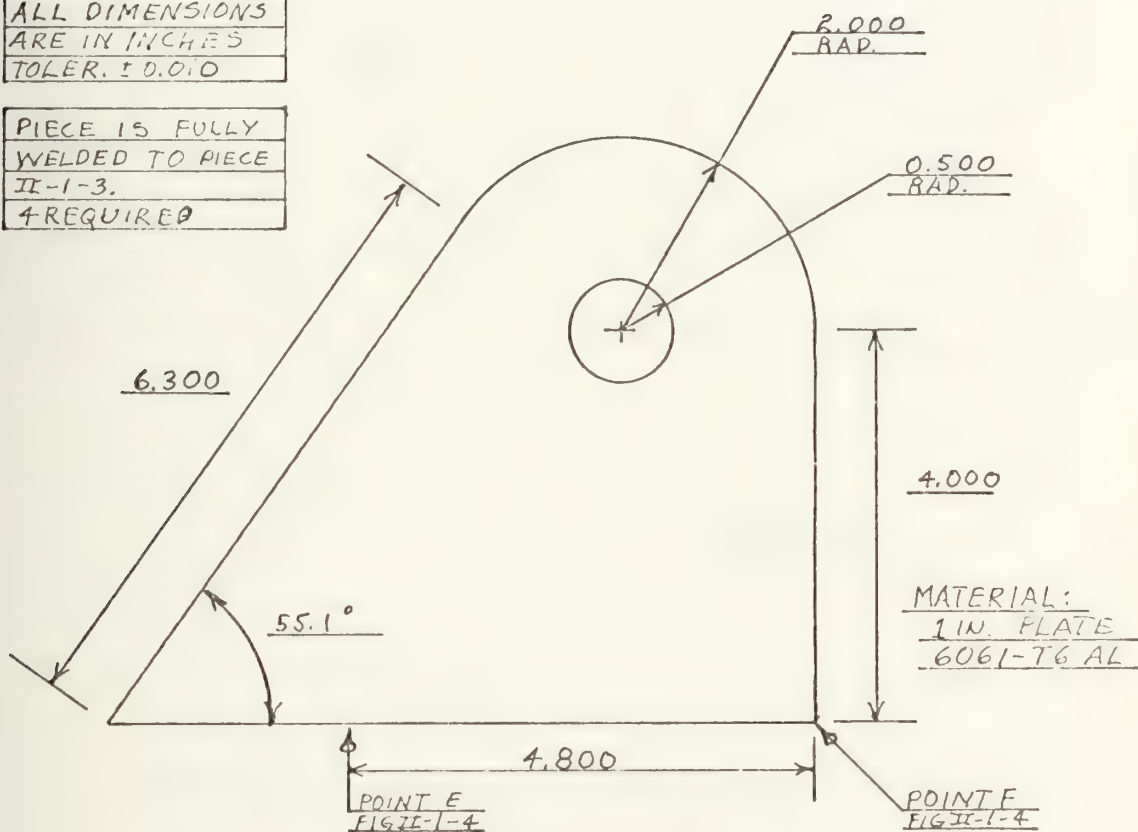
PIECE II-1-5, LIFTING PAD
